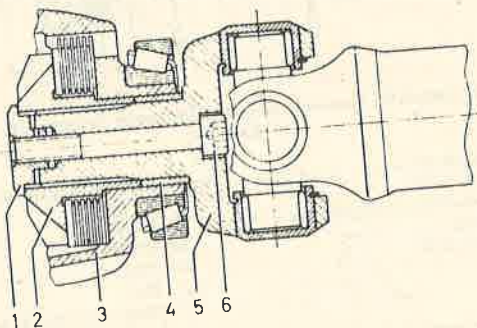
Sectional view of axleshaft universal joint (Sec. 11)
